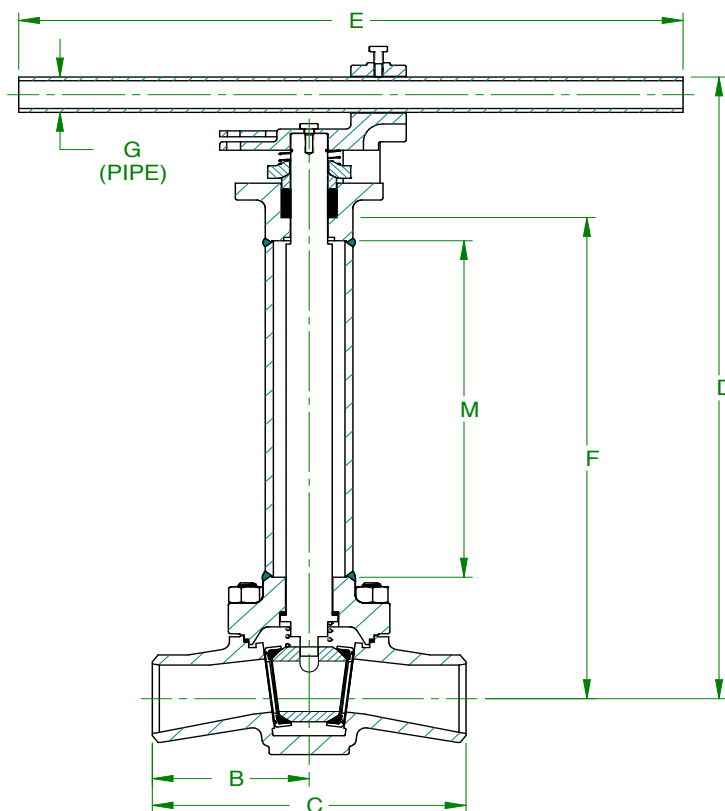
/600, STANDARD/FULL PORT, BUTT WELD
